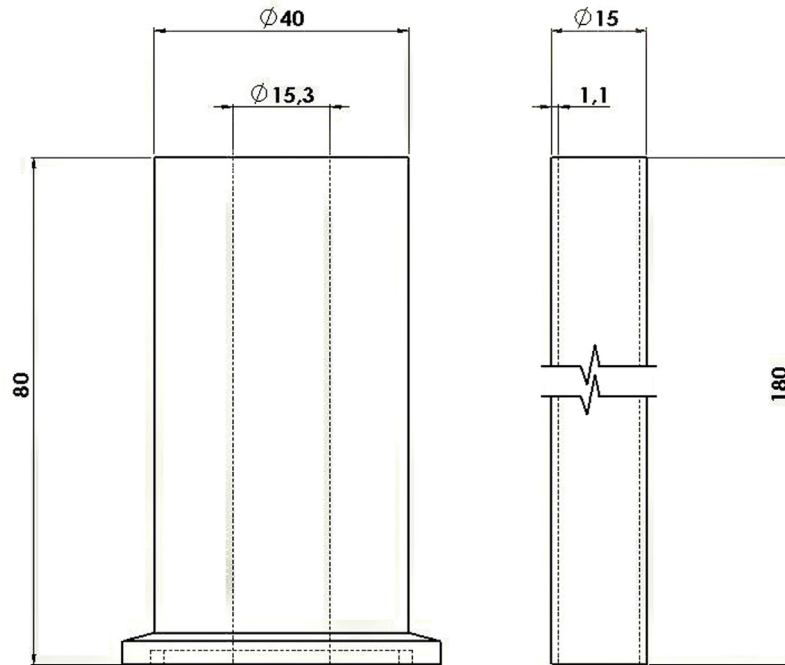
Drawings of single hole tube sheet dummy and tube geometries for investigation of HFDB in CWHE.
